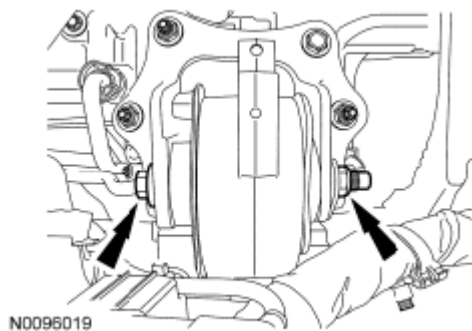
Locating Transaxle Mount Through Bolt & Nut
